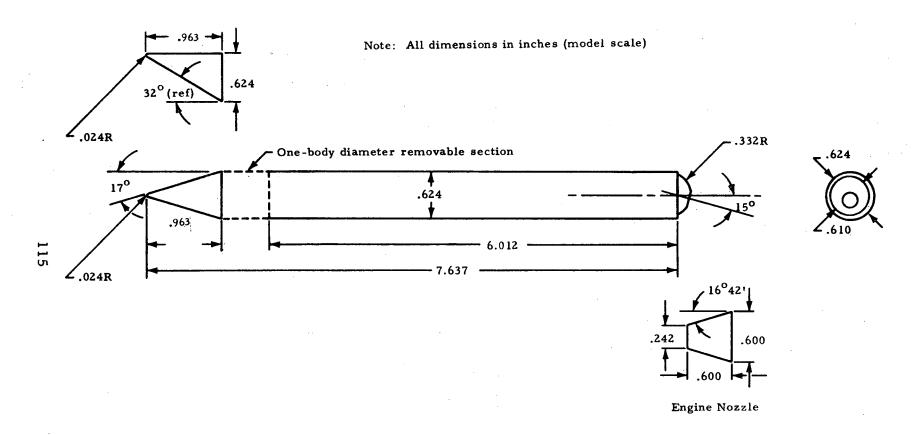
156-Inch Solid Rocket Motor with Standard and Skewed Noses and One-Body Diameter Extension
